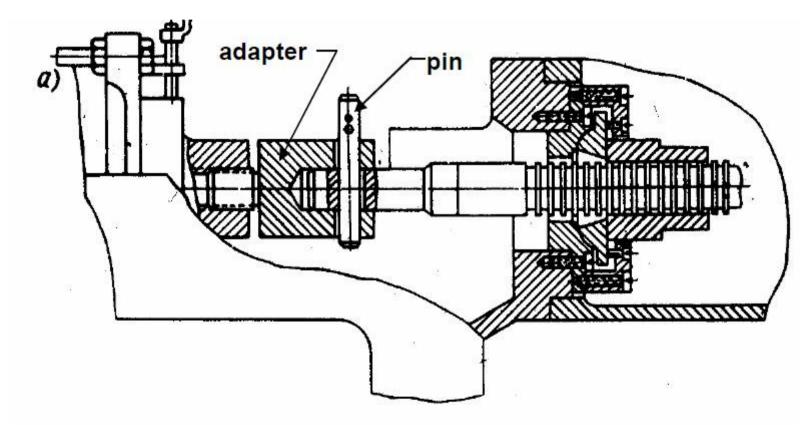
Fitting pull type broach by an adapter and a pin.
